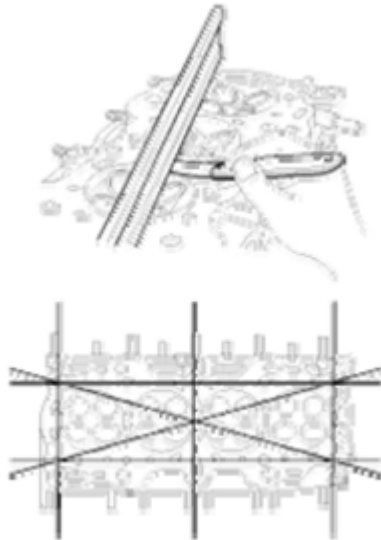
Checking Flatness Of Contacting Surfaces Of Cylinder Block & Manifolds
